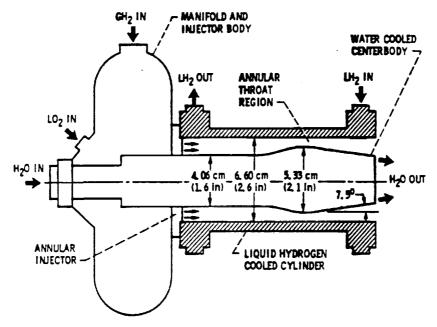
Schematic of cylindrical thrust chamber assembly.
